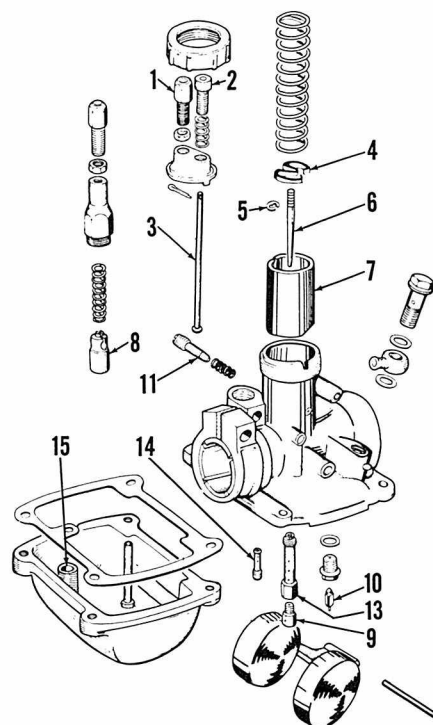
Exploded view of Mikuni VM type carburetor.
